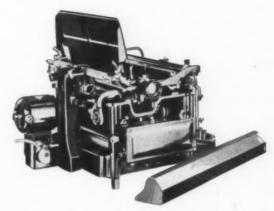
Design of this typewriter embodies a cold drawn shape as the carriage rail
